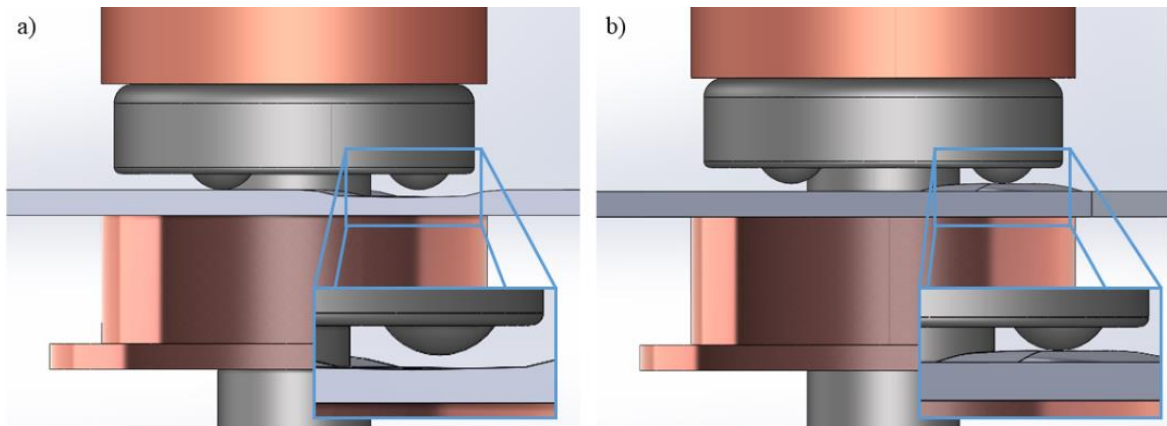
Different critical welding scenarios arise due to flatness defects. a) Valley; b) Mount.
